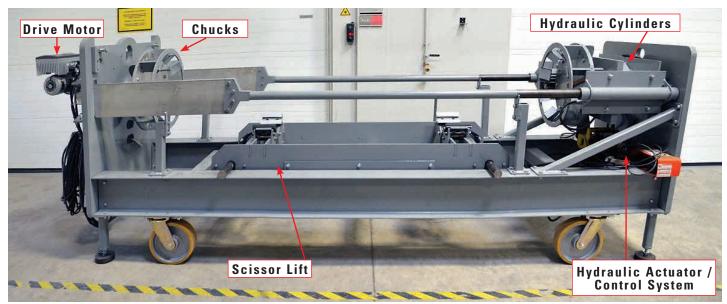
Rotation Equipment (ROTEQ) for Mark II Used Fuel Container welding.
